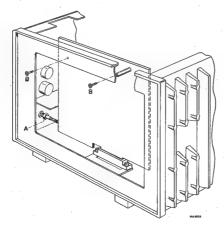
Removing the output unit (printed wiring board PM 5775-3)
